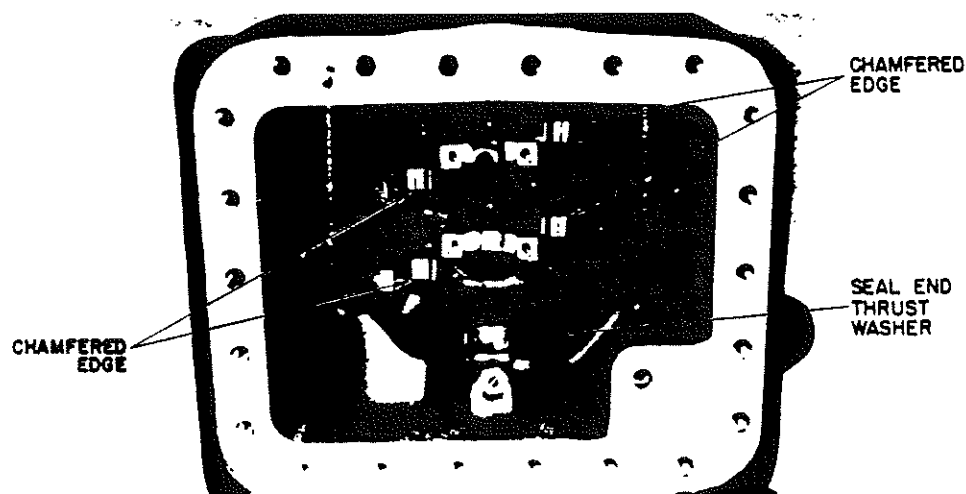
Installing Piston Rod Assemblies and Seal End Thrust Washer
